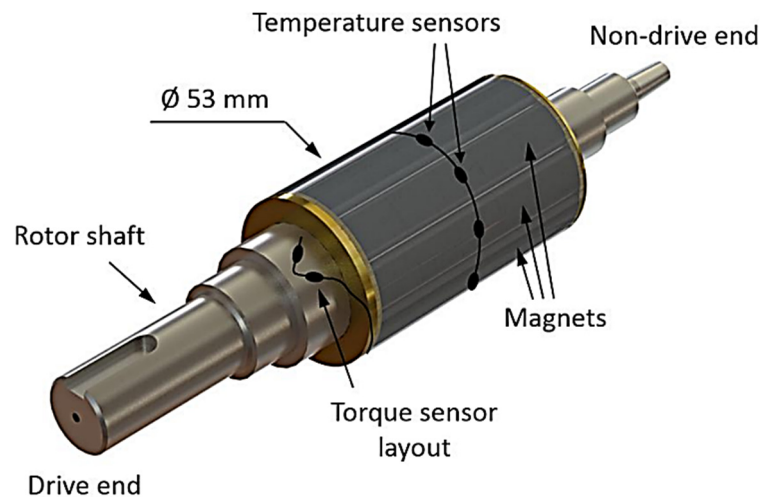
Multi-parameter sensing in the PMSM rotor [5].
